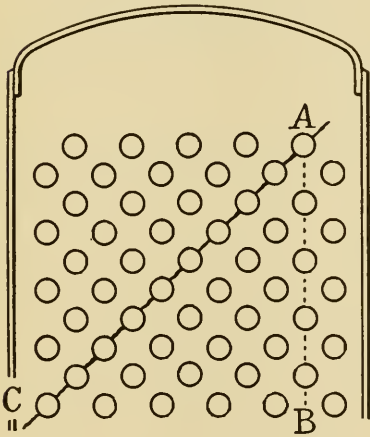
ILLUSTRATING A CYLINDRICAL SHELL PERFORATED WITH TUBE-HOLES.
